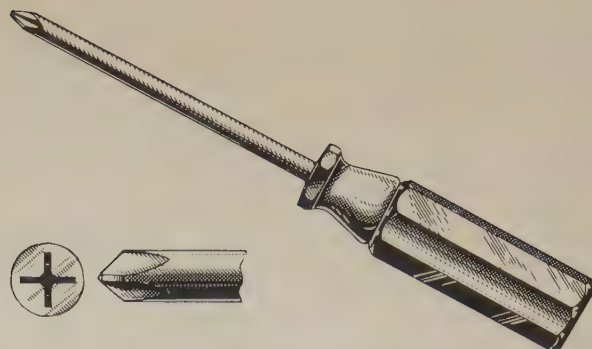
A Phillips-head screwdriver and the slotted head of a Phillips-head screw.
